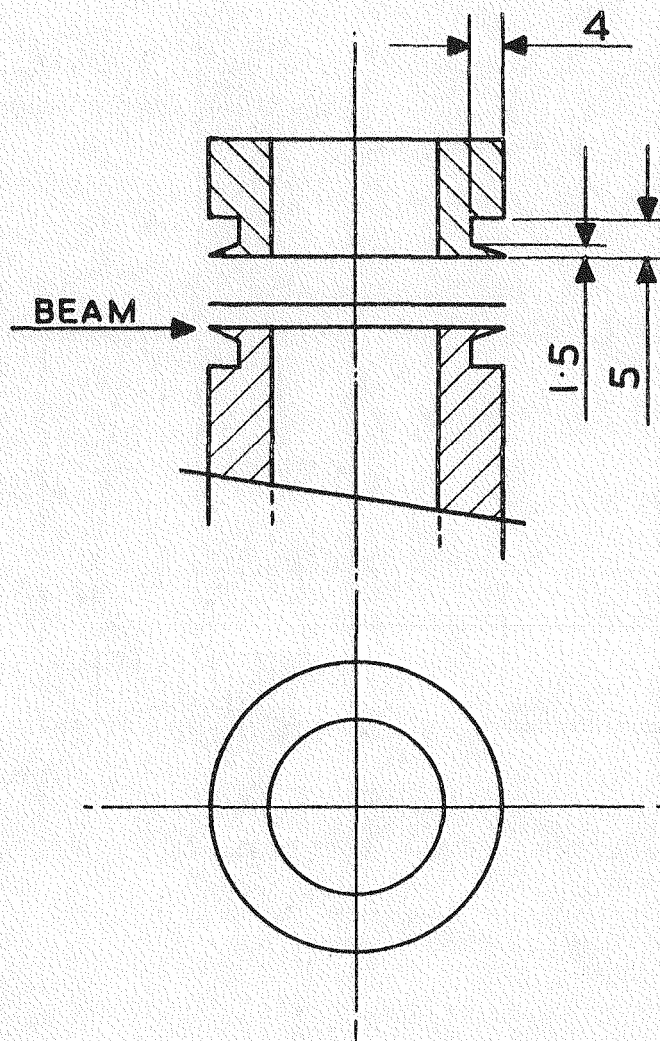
EDGE WELD WITH HORIZONTAL BEAM.
